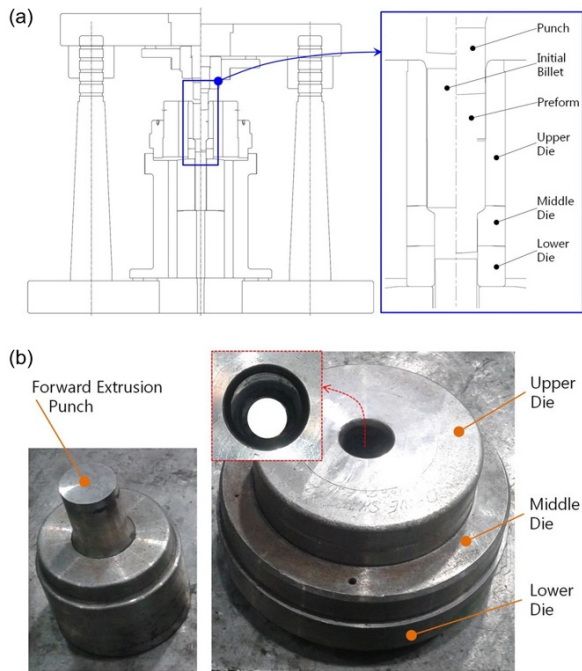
Forging punch and forward extrusion die assembly for preform fabrication: (a) tool structure and its assembly; (b) fabricated forging punch and die assembly.
